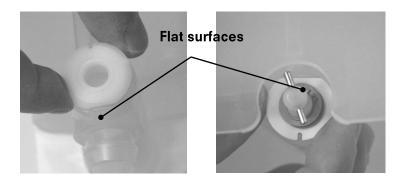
Align front (shown on the left) and back bushings (shown on the right) with flat surface
